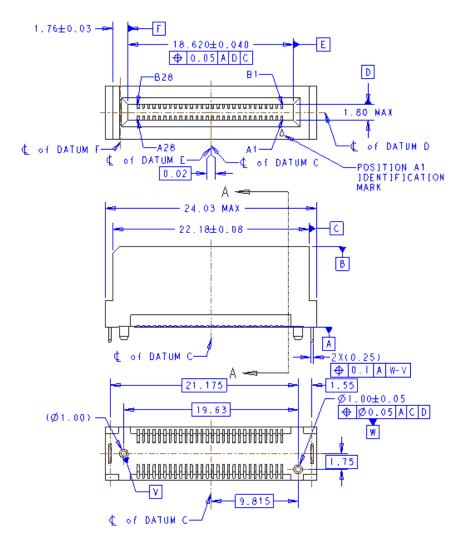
1C STRAIGHT CONNECTOR DIMENSIONS
